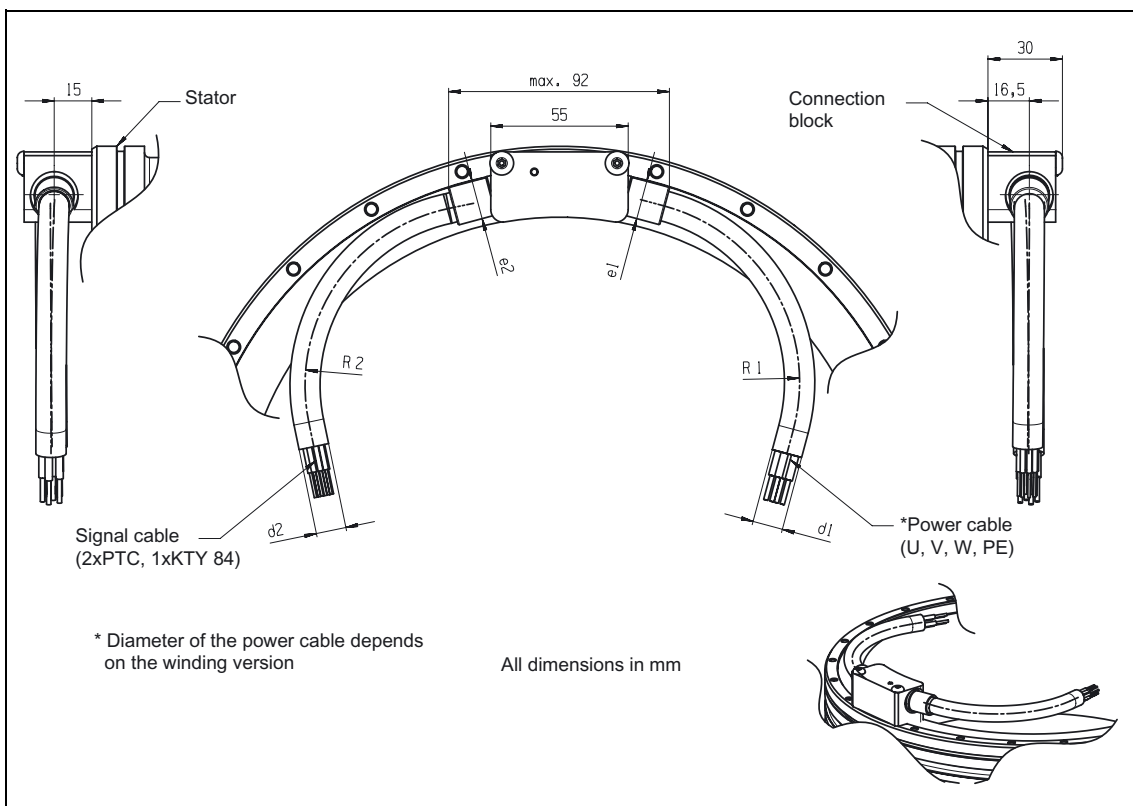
Tangential electrical connection with sleeve for 1FW6130 (motor type B)
